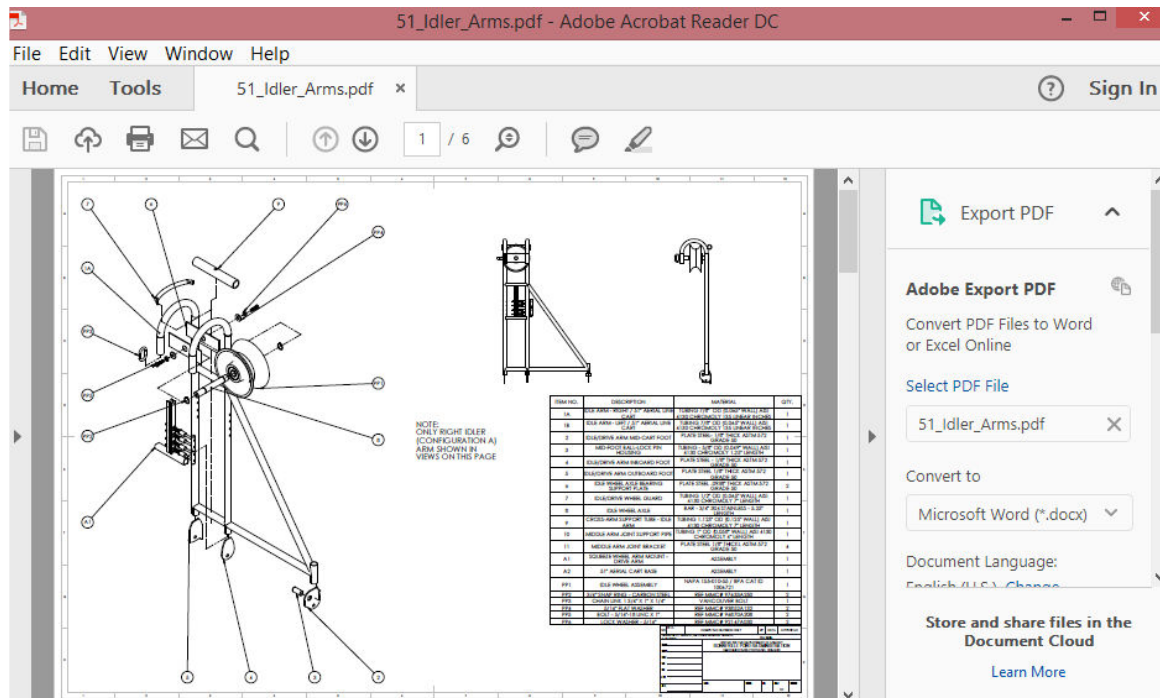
PDF file from the Spacer Cart example accessed through the interface with Adobe Acrobat provided in the Parts & Assembly tab.
